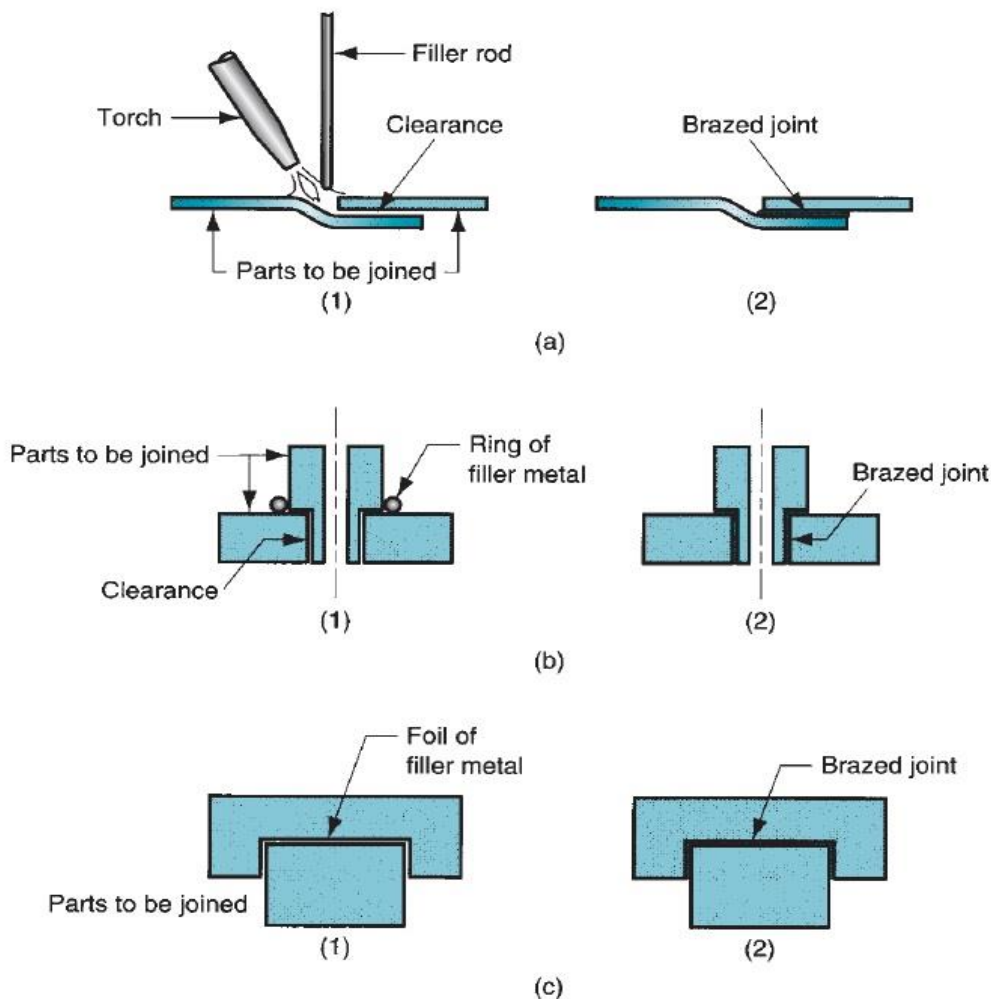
Several techniques for applying filler metal in brazing: (a) torch and filler rod; (b) ring of filler metal at Entrance of gap; and (c) foil of filler metal between flat part surfaces. Sequence: (1) before, and (2) after.
